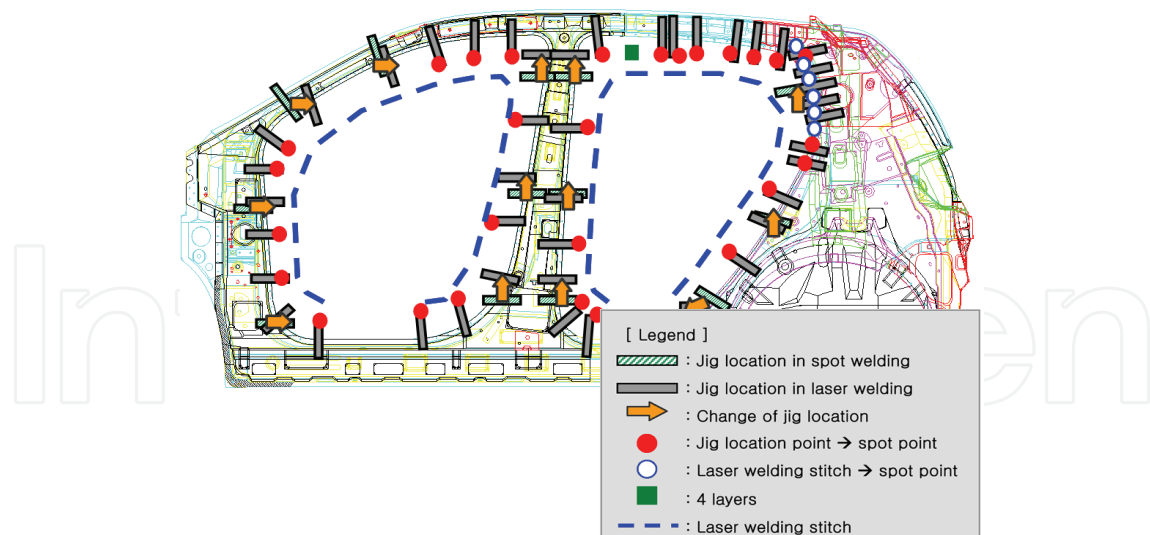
Determination of jig points, spot welding points and laser welding stitches.
